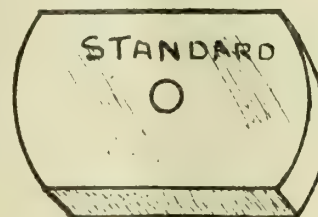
SETTING PIECE FOR ADJUSTABLE CALIPER (EXTERNAL) GAUGES AND STANDARD REFERENCE BAR.
